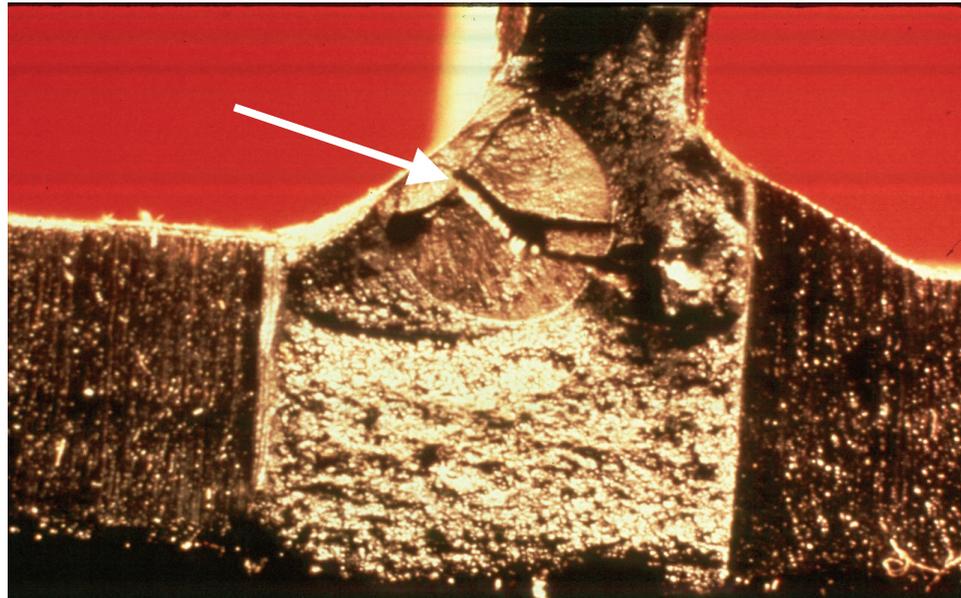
Web to Flange Crack due to Fillet Weld Slag Inclusion
